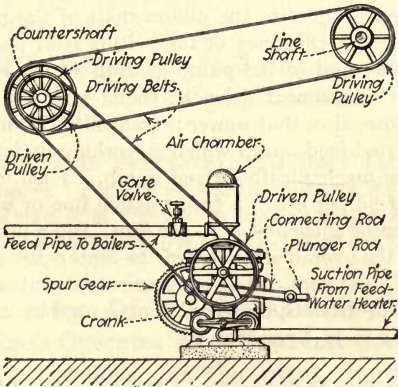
A Mechanically-Driven Boiler Feed-Pump. (For boilers carrying steam pressure under 85 pounds per sq. in.)
